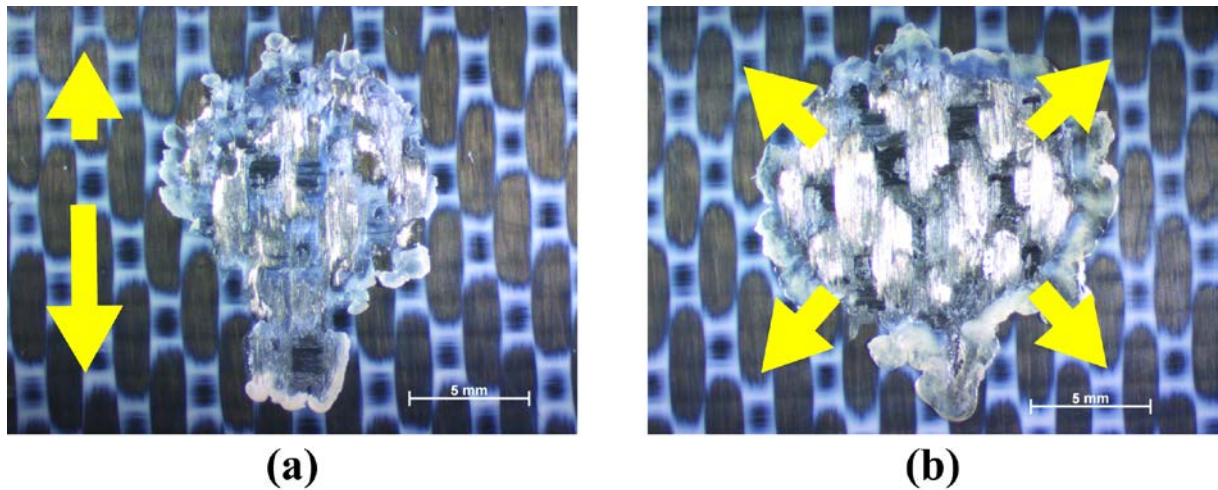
Representative fracture surfaces of SSW joints welded in (a) Jig 1 and (b) Jig 2. The arrows indicate the non-uniform flow of the molten ED in Jig 1 and uniform flow of molten ED in Jig 2. (For interpretation of the references to colour in this figure legend, the reader is referred to the web version of this article.)
